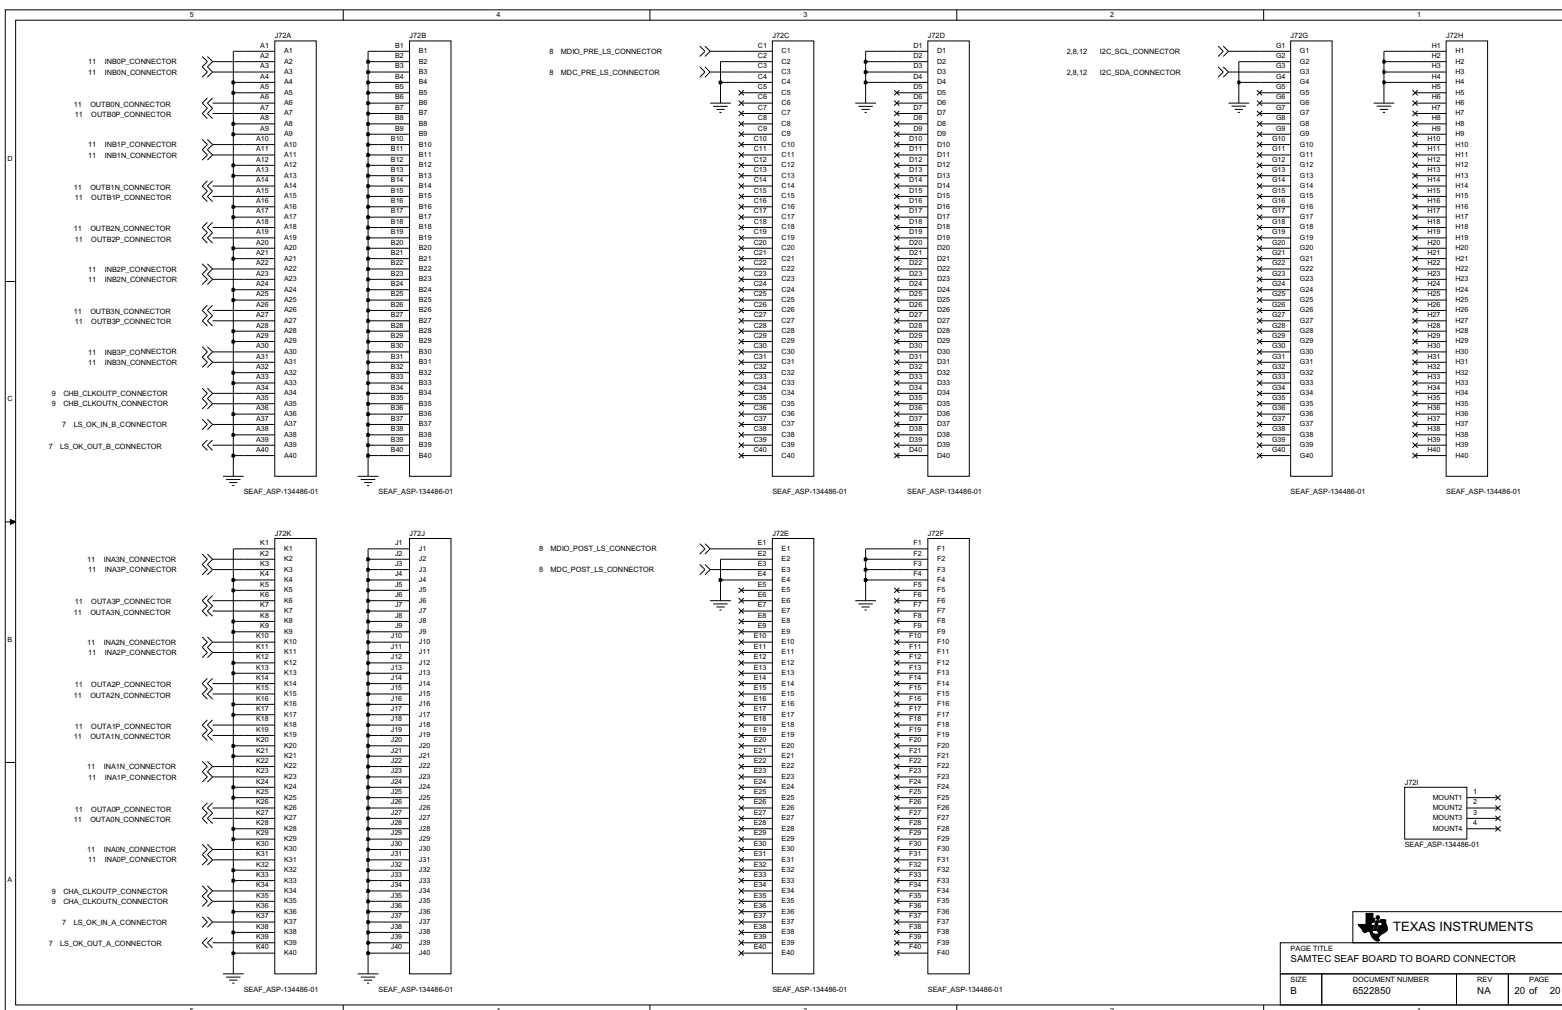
Board-To-Board Connector, Sheet 20 of 20
